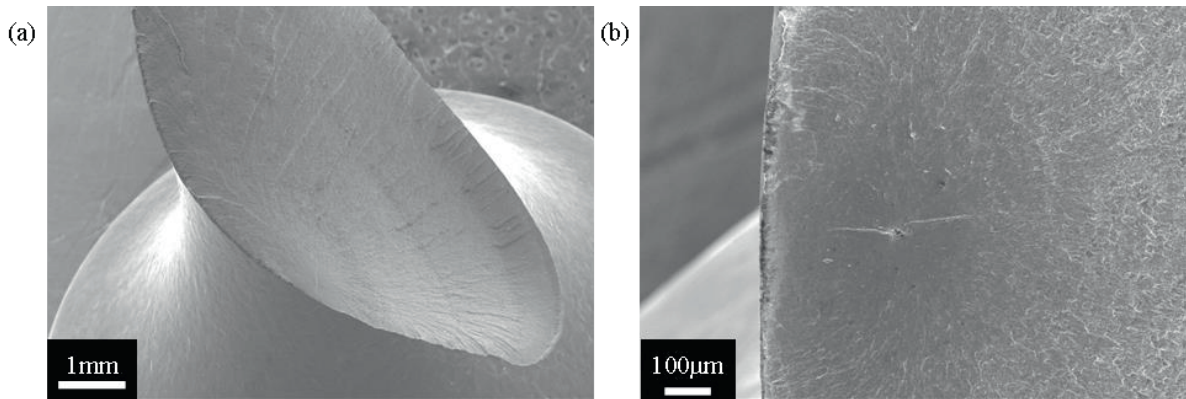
Internal fracture specimen of steel A ( $\tau_a=950\text{MPa}$ ,  $N_f=5.4\times 10^7$  cycles) (a) over view; (b) fracture surface.
